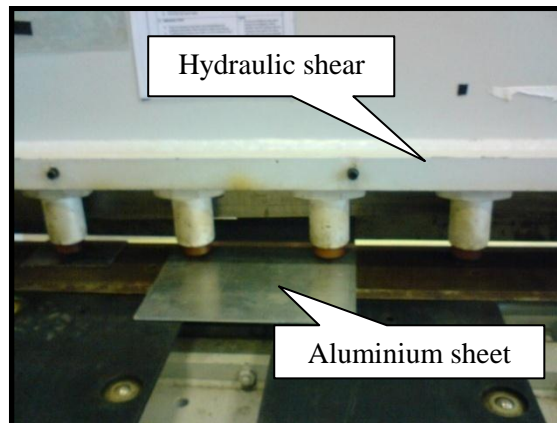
Cutting the specimen by using hydraulic shear machine.
